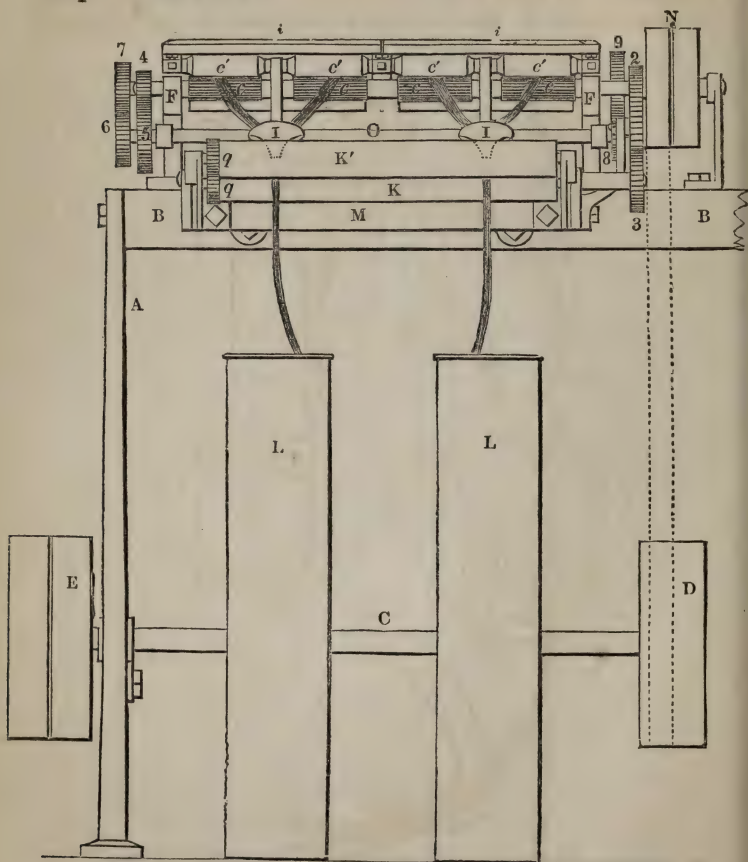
Drawing Frame. Front view of one head. Scale, one inch to the foot.
